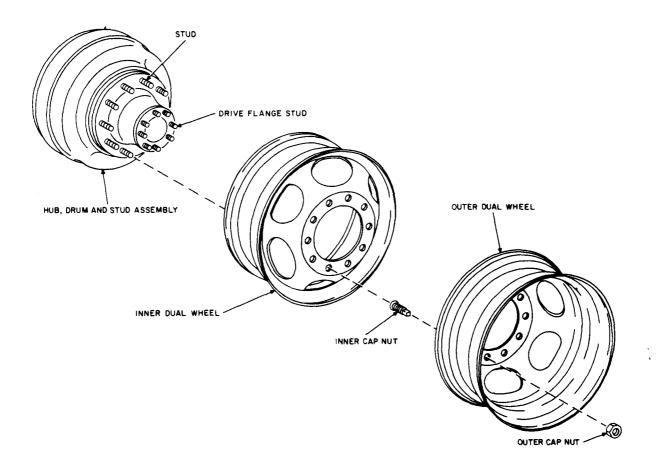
Disc Wheel Dual-Mounting—Exploded View
